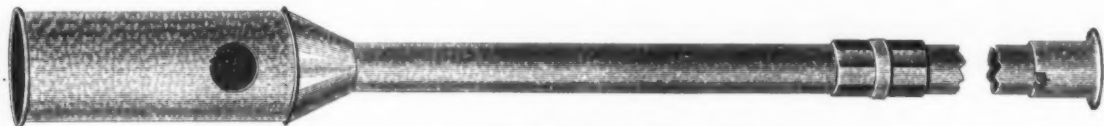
Galvanized Steel Chain Pump Tubing.
